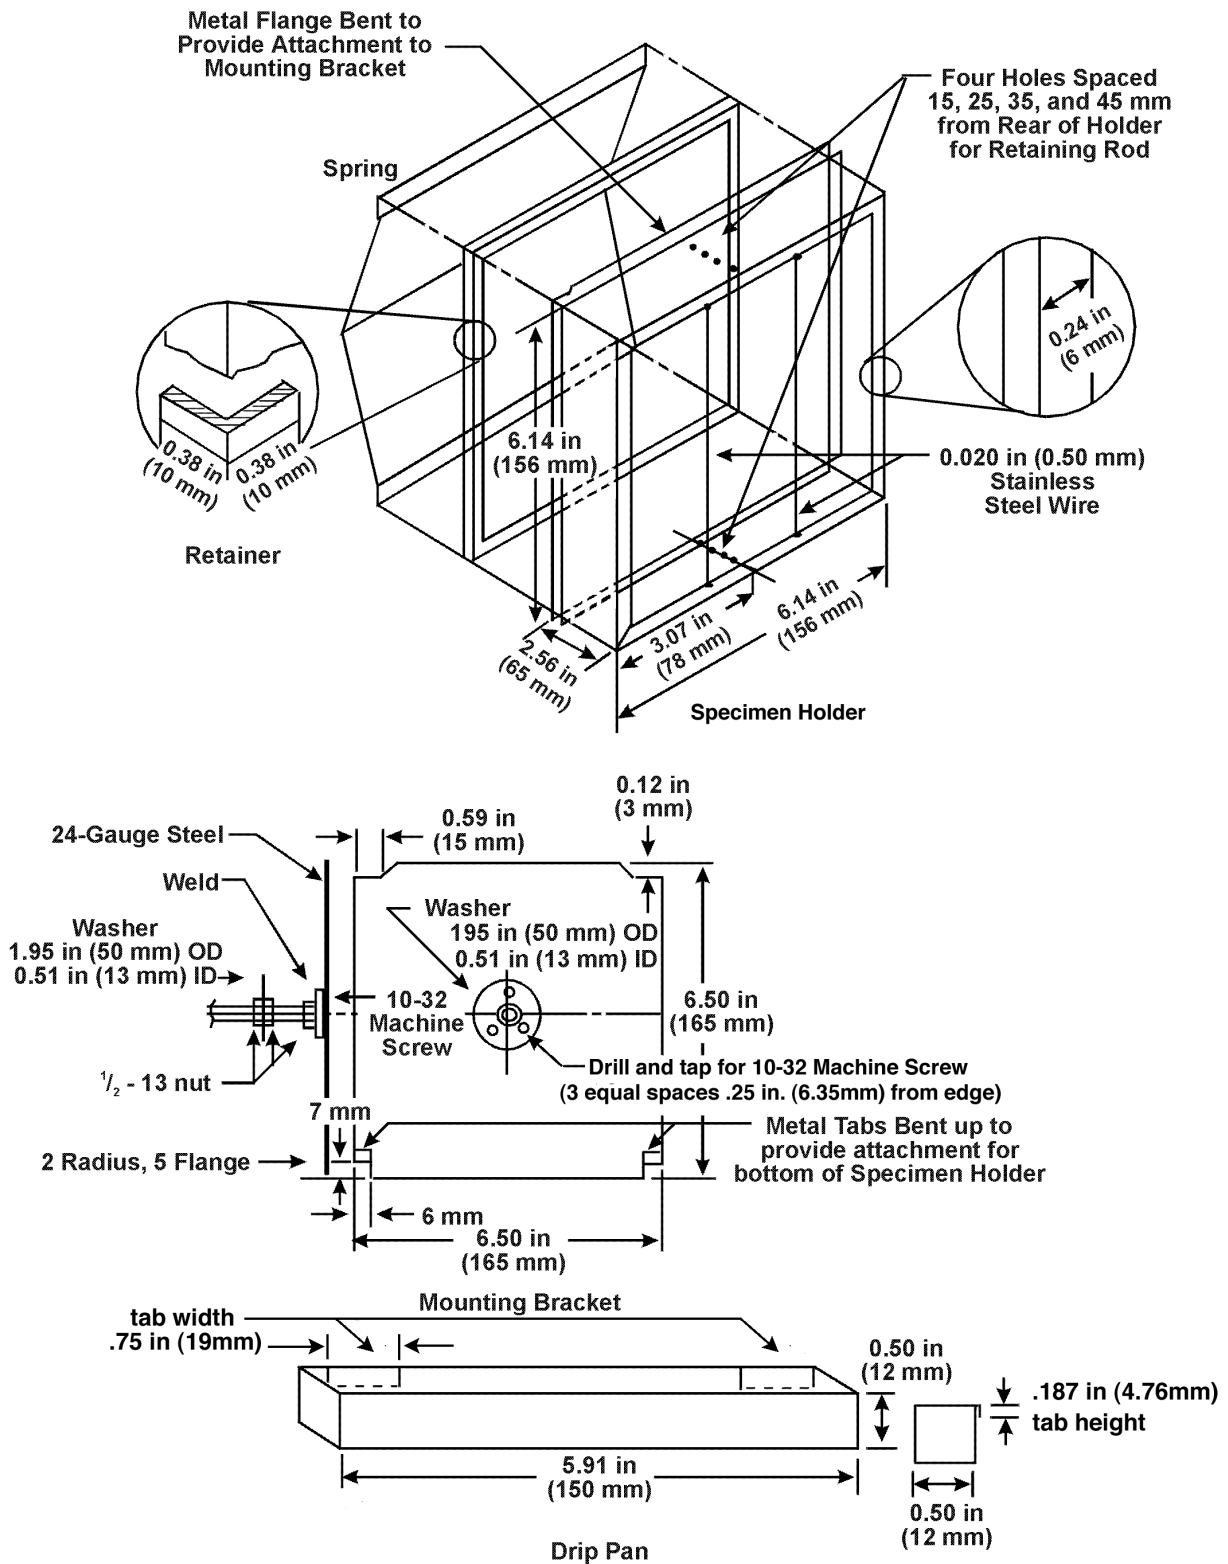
Heat Release Specimen Holder, Mounting Bracket, and Drip Pan
